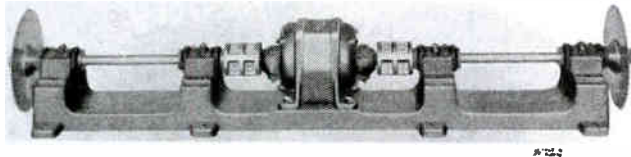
1 H.P. Induction Motor Direct Coupled to Two 12 in. Cross Cut Trim Saws
